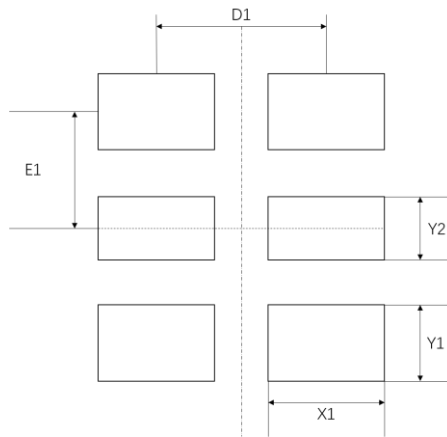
DSO3001 (5032 and 3225) PCB Land Pattern
